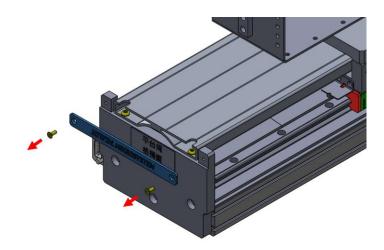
Exploded view of the cover - here for LMSSA2X
